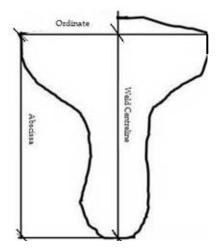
SKETCH OF A TYPICAL WELDED JOINT SHOWING WELD CENTRELINE, ABSCISSA AND THE ORDINATE DISTANCES
